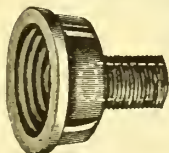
Coupling small end cut 1/4-inch pipe thread to fit our spray nozzles, large end cut to fit 3/4-inch, 1/2-inch or 3/4-inch male hose coupling.
